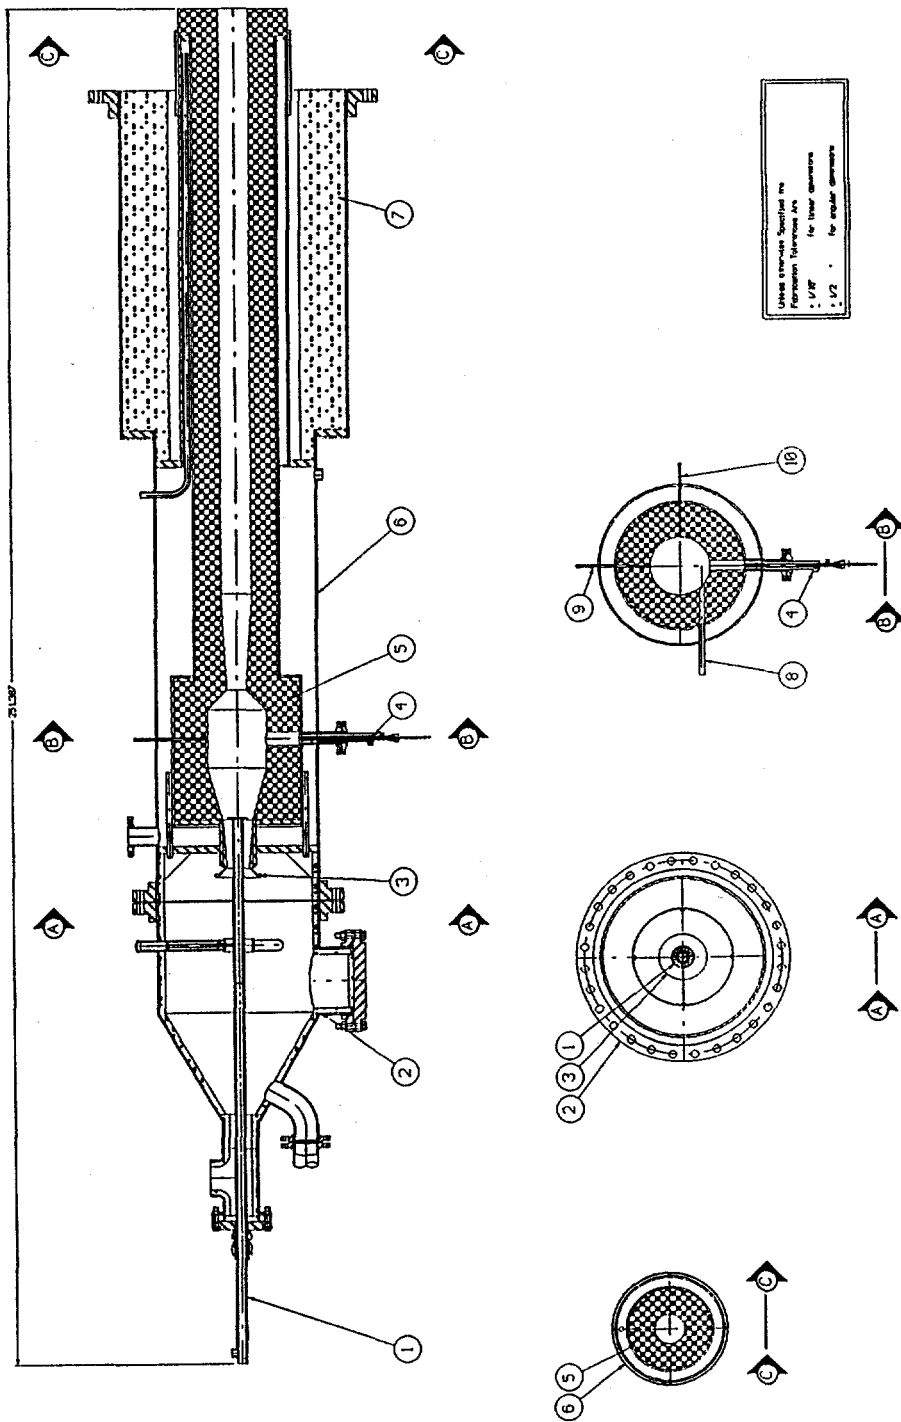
PULSE COMBUSTOR ASSEMBLY
